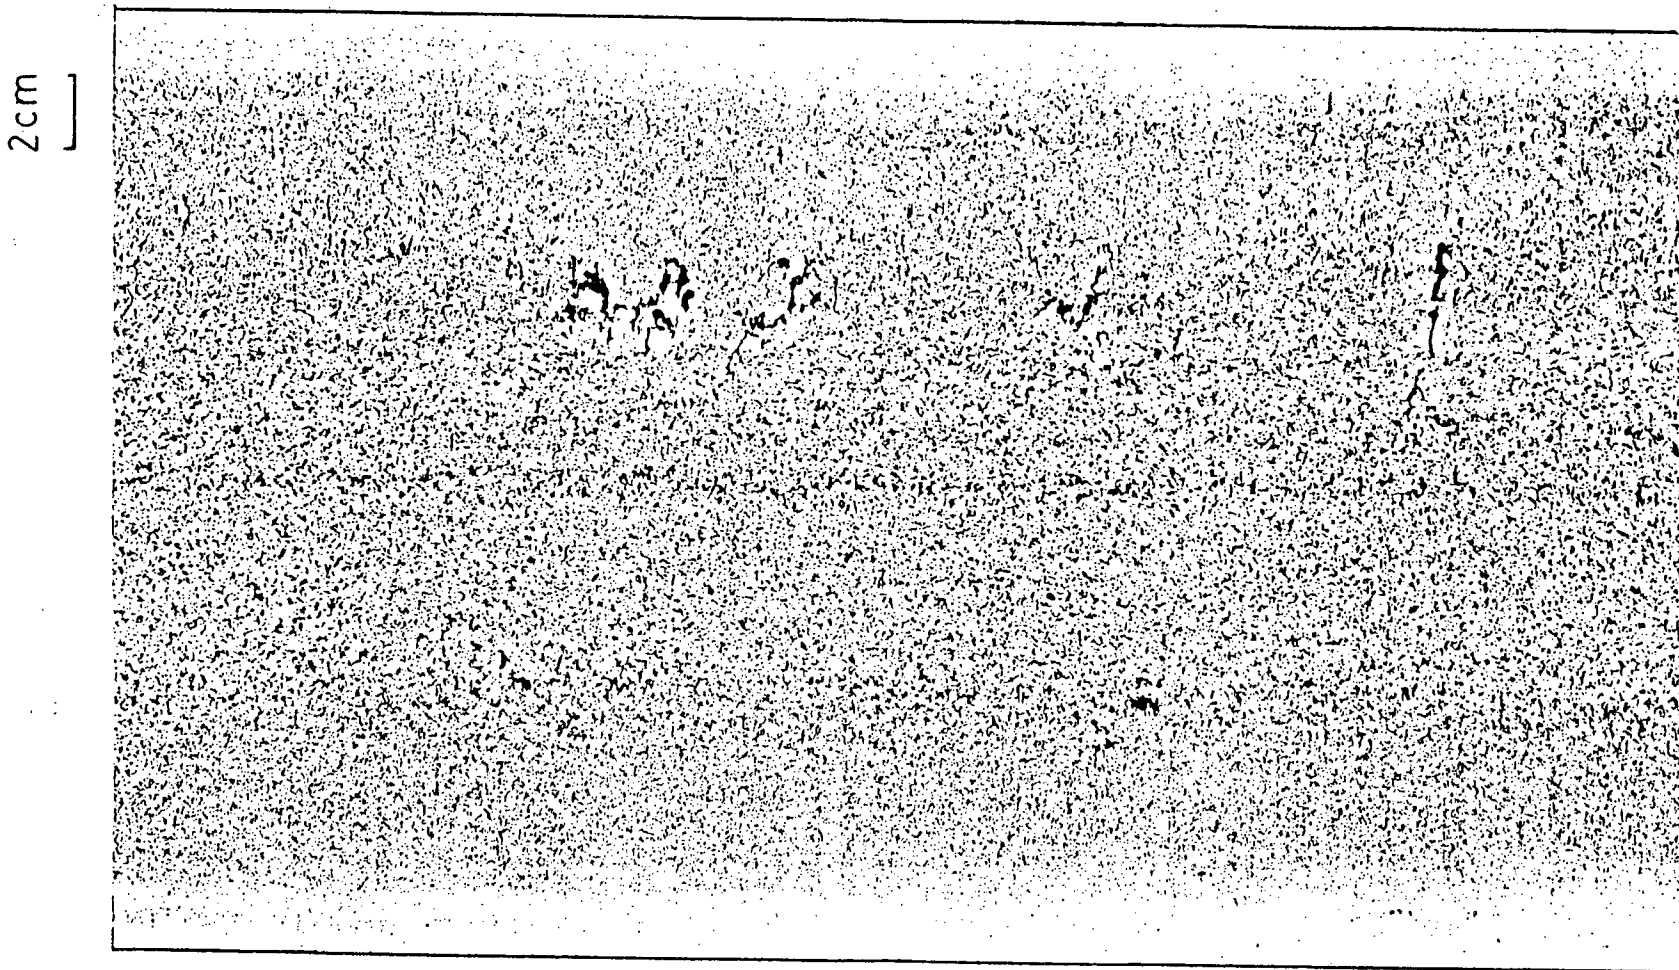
Sulfur Print of a Longitudinal Section ; Rating of Internal Cracks = 1.0.⁴⁶
